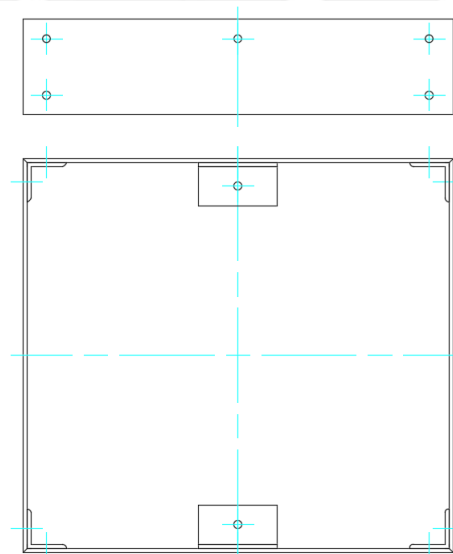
Structure based on thin metal plates, assembled using L-shape profiles and screws (front and back views)
